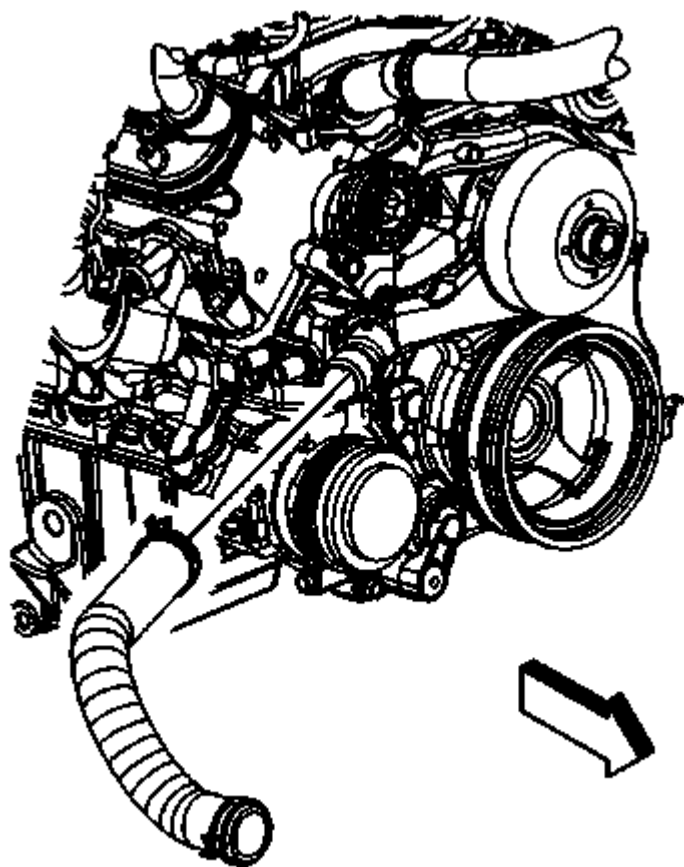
View Of Engine Ground Strap & Bolt
